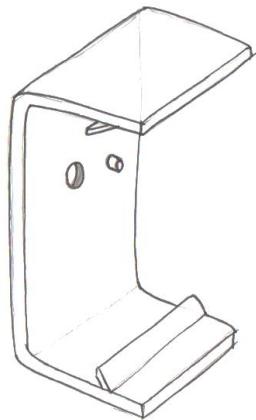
, C-PART (GETS WELDED ON OUTER BOX)
